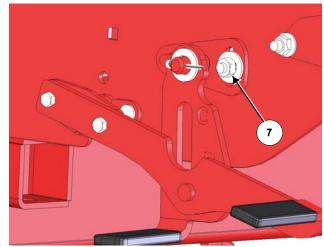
Adjust the Door Latch Mount for the Door to Lay Flat
